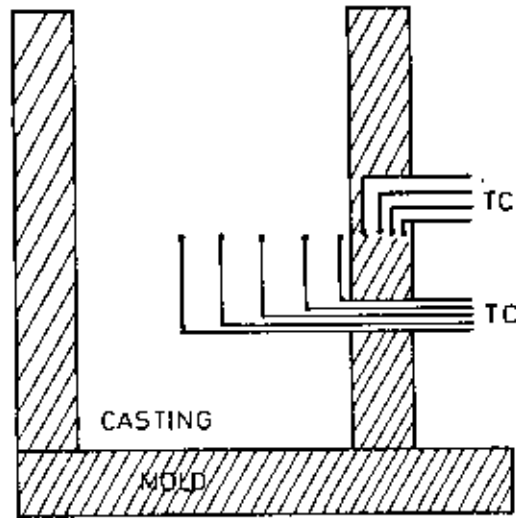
LOCATION OF THE THERMOCOUPLES IN CASTING AND MOULD.
